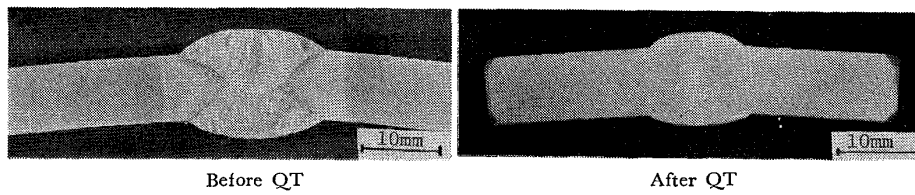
Macrostructure of welded joints of 9% Ni steel pipe A.
